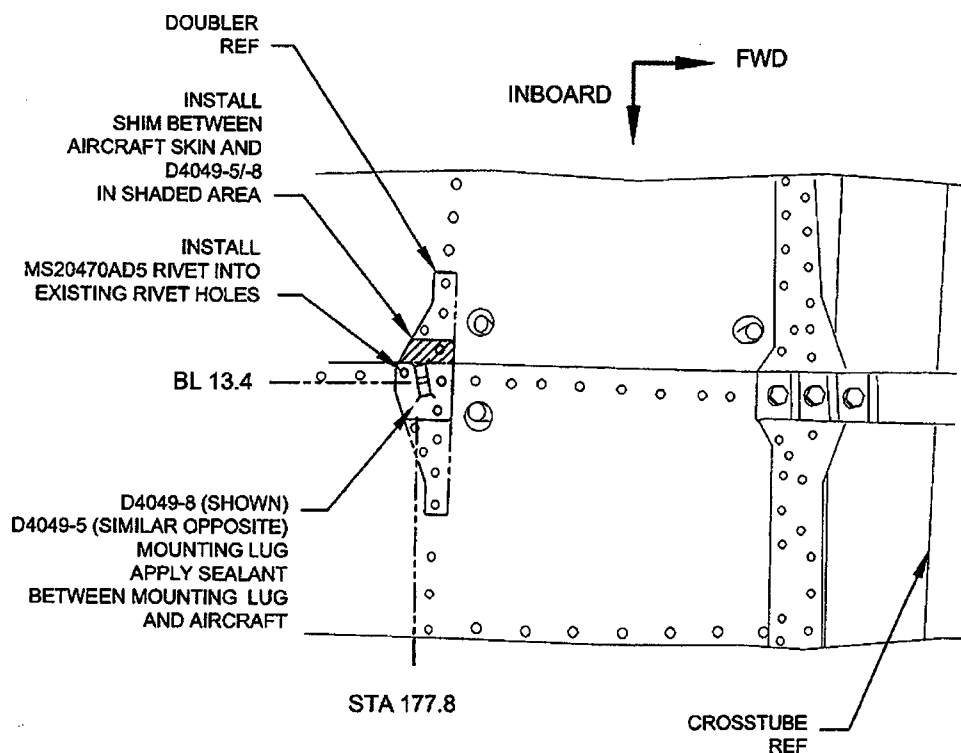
Section J-J (New Hard Point Installation at STA 177.8)
